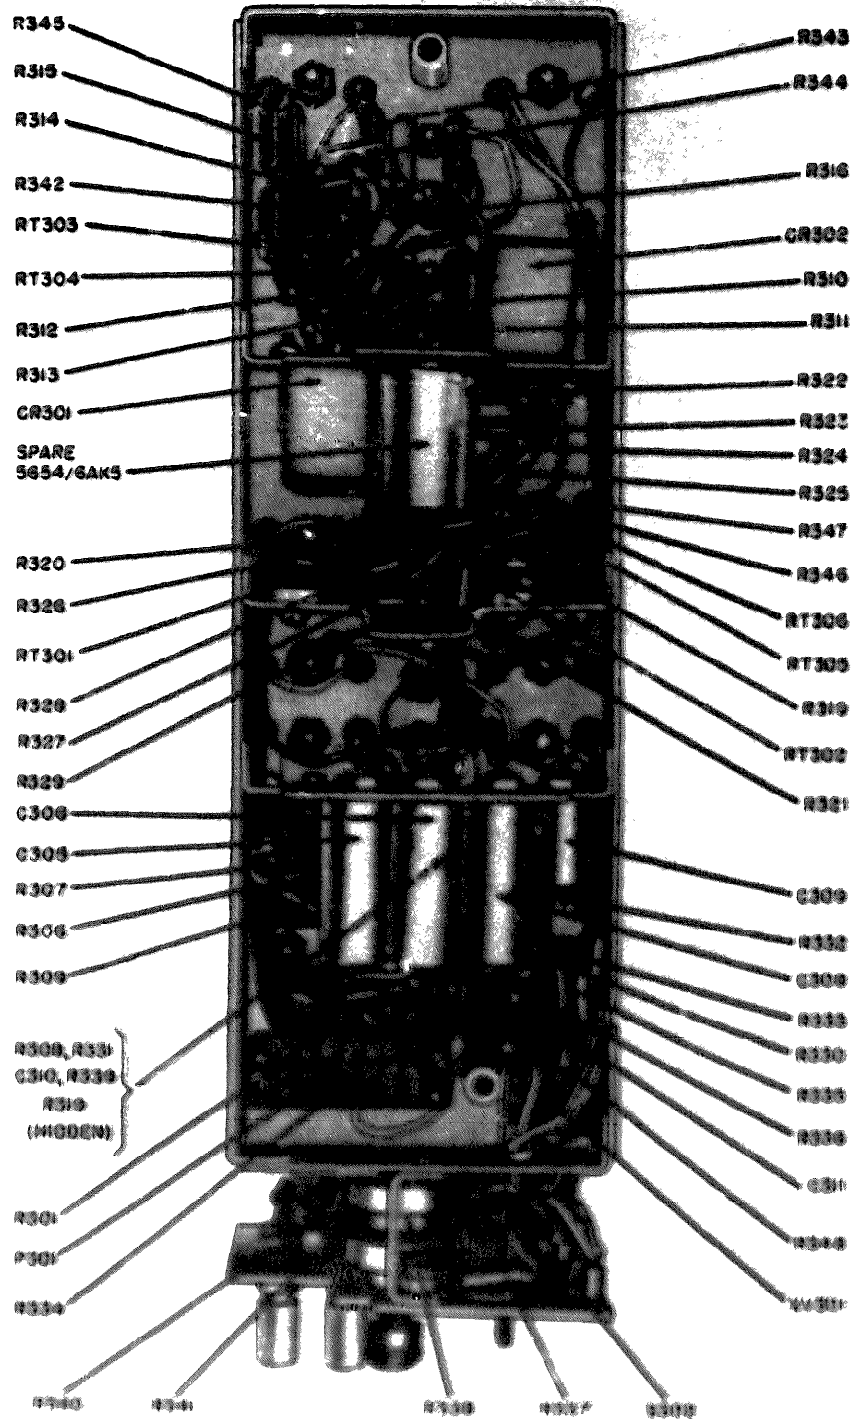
Channel & modem plug-in assembly, bottom view, circuit element location diagram.
